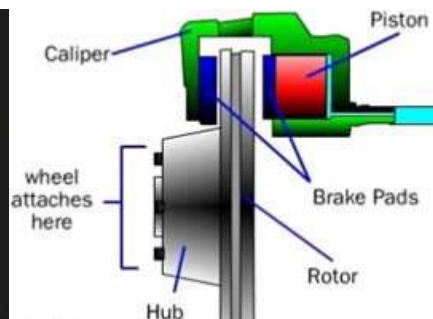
Principle of working of disc brake Fig.2 single-piston floating caliper disc brakes
